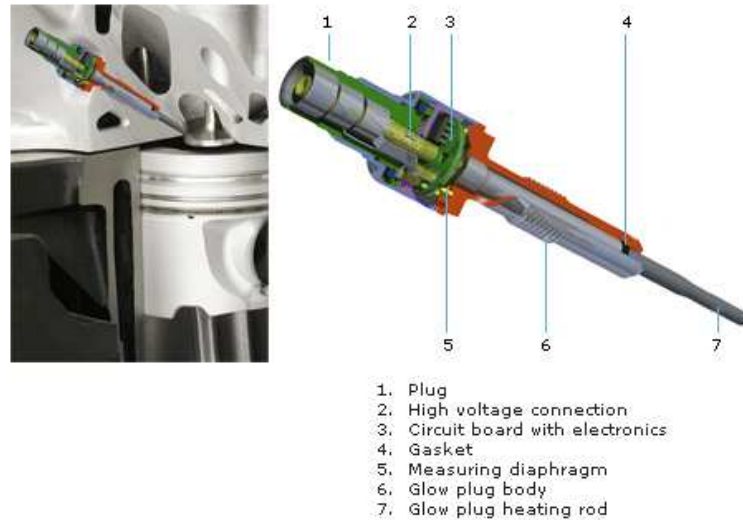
The Beru Integrated Glow Plug with Piezo-resistive sensing element moved to a cooler location in the Cylinder head.
